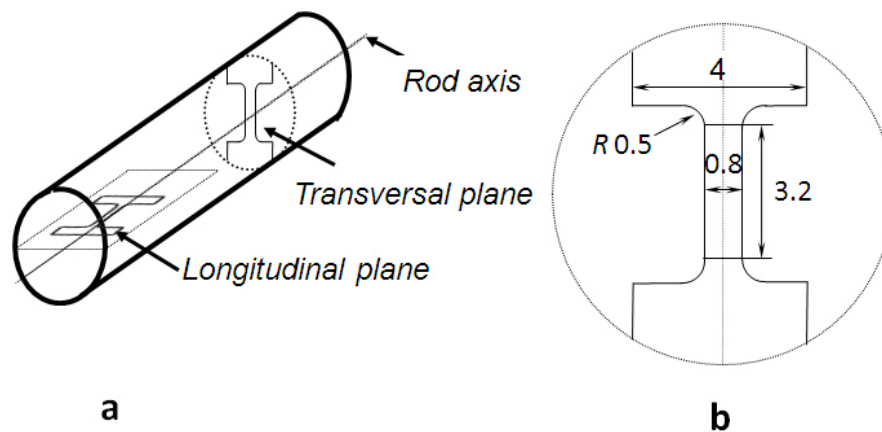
(a) Rod axis, transversal and longitudinal planes in the extruded rod; (b) schematic drawing of specimen dimensions.
